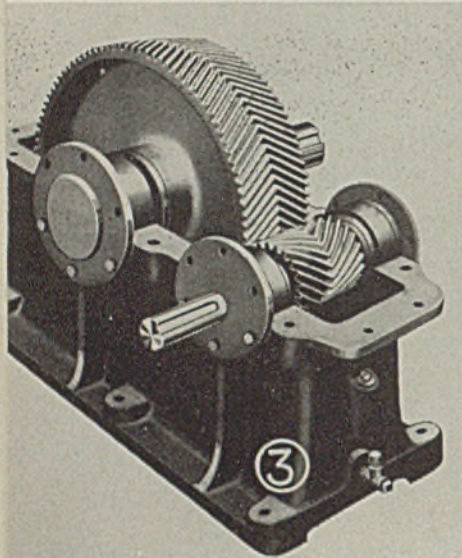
Single reduction herringbone speed reducer with top cover removed
